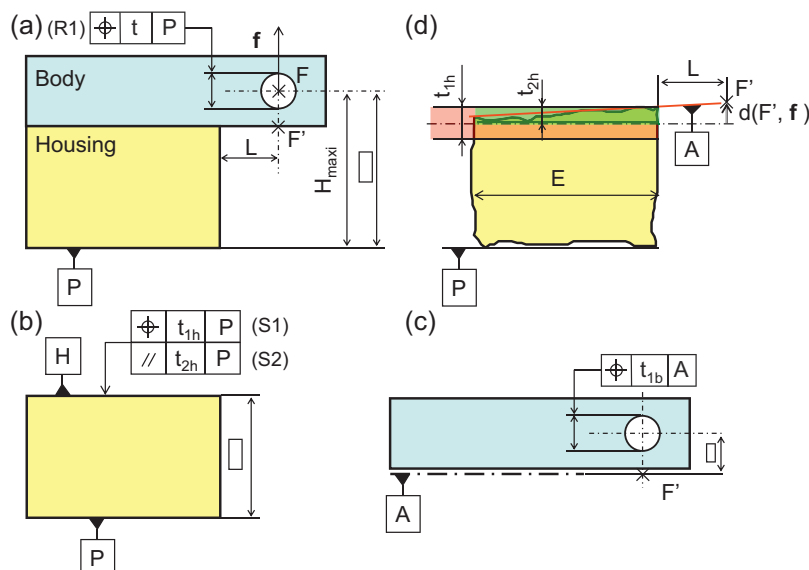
Basic tolerance chain with contact surfaces.
